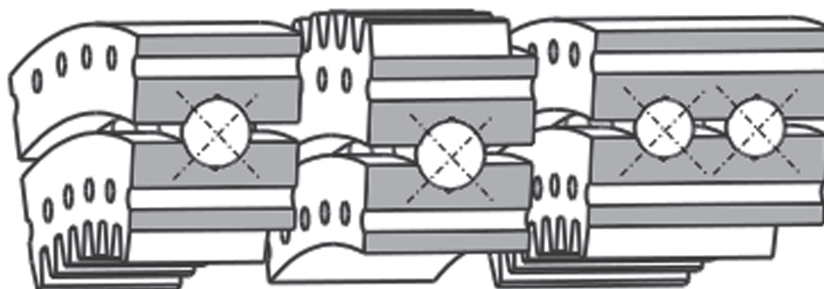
Examples of four-point contact ball bearings for the use as wind turbine pitch bearing
